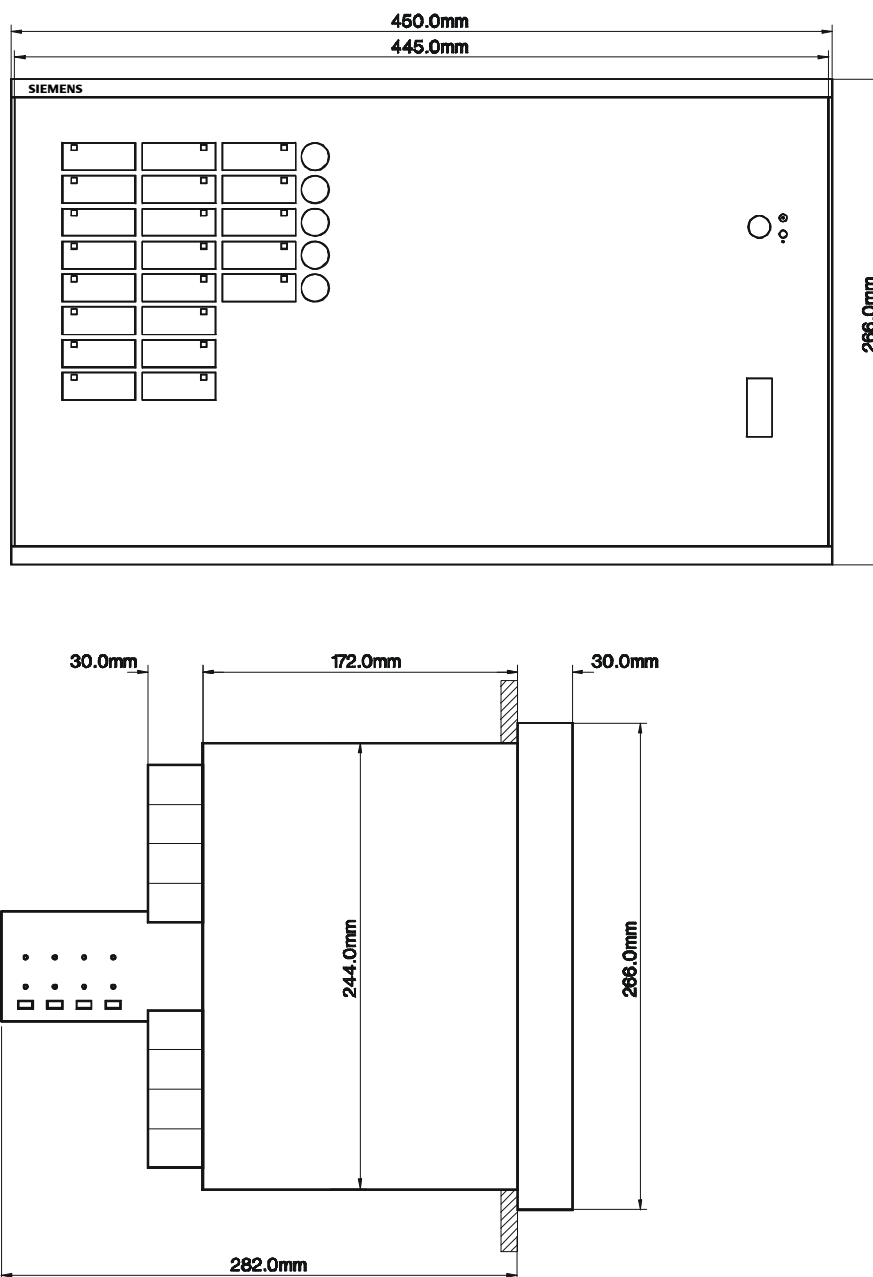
Dimensional drawing, panel flush mounting; ZE 32/64 (1)
